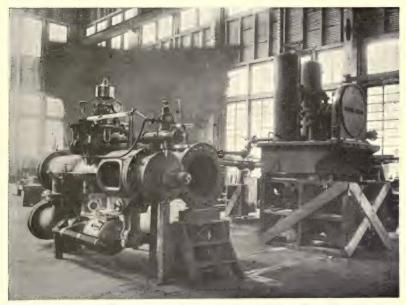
10,000 Horse-power Auxiliary Relief Type Nozzle. (Built by Pelton Water Wheel Company.)
